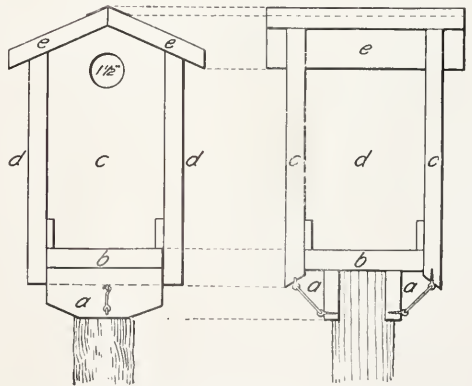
Diagrammatic drawings of bluebird house. This house can be removed from its floor by unfastening two wire hooks.
